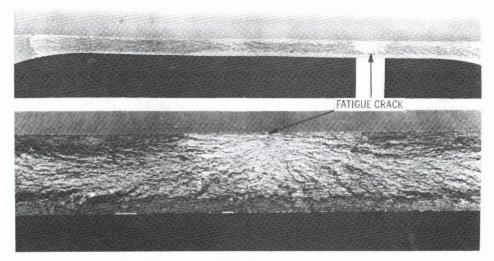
Fatigue crack in 7075-T73 aluminum hydraulic cylinder (ref. 3).
